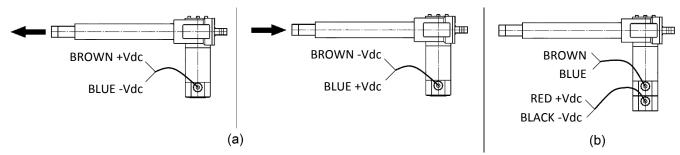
Electric wiring diagrams to motor terminal board of DC motor
